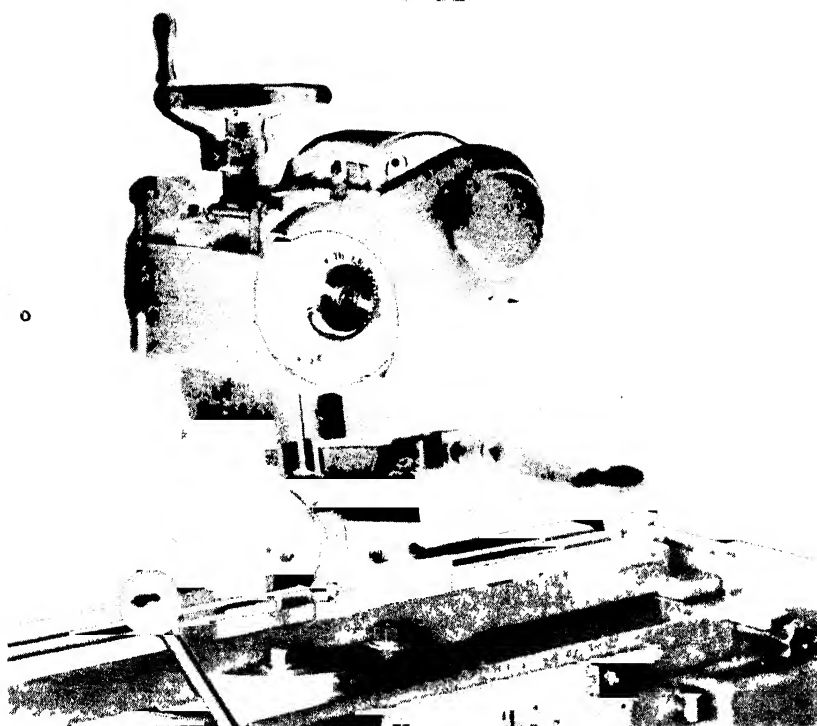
Sharpening a Straight, Dovetail Forming Tool with Back Rake
